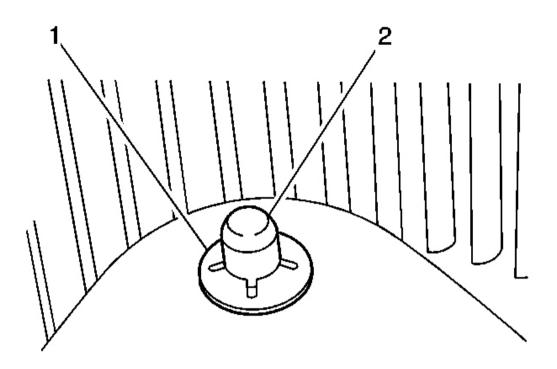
Blower Motor Impeller & Blower Motor Courtesy of GENERAL MOTORS CORP.
